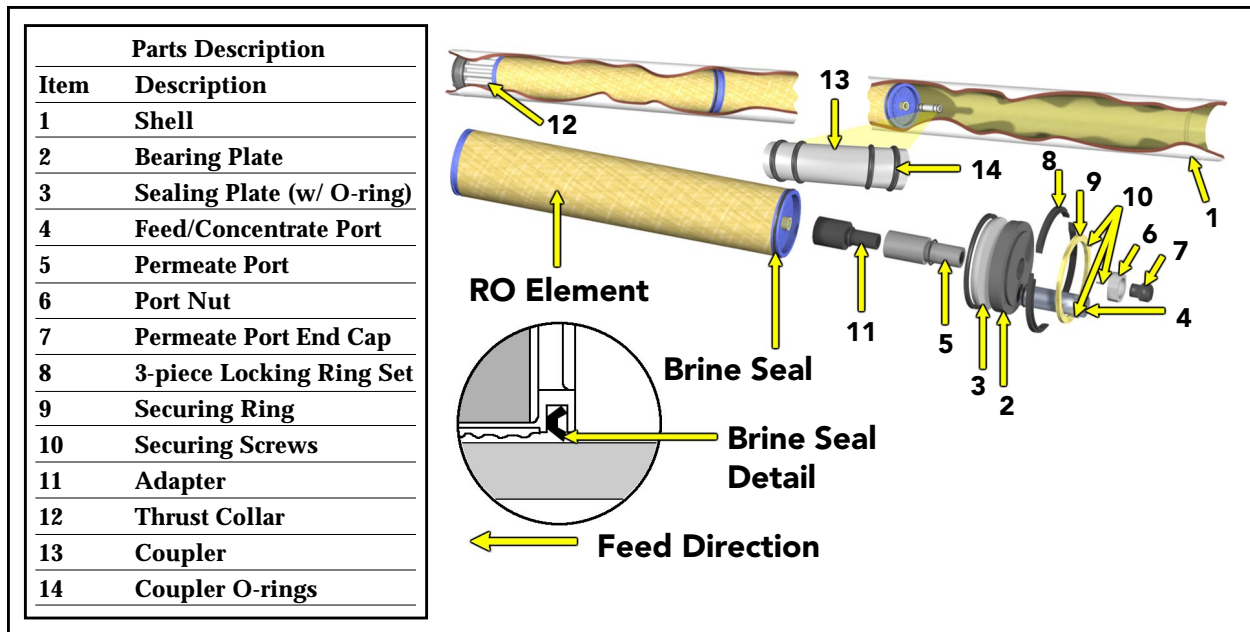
Pressure Tube Cutaway With Components Identified
